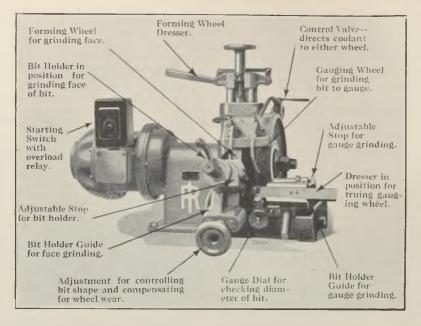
INGERSOLL-RAND JACKBIT GRINDER.
